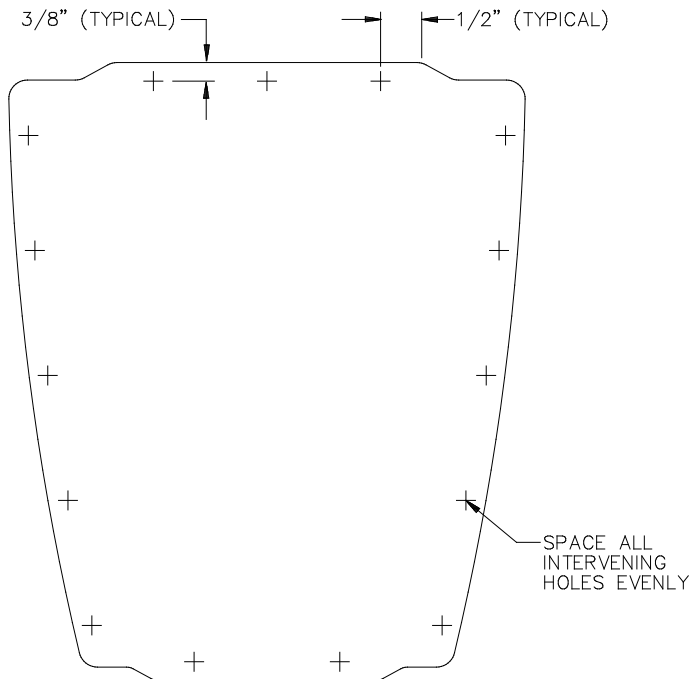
Aft Shearweb Bolt Hole Pattern
